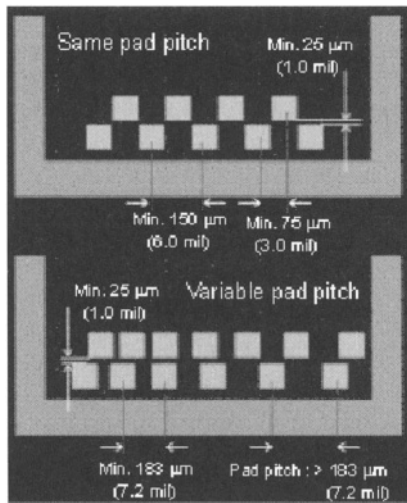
Bond pad layout for staggered bonds [P-56]
